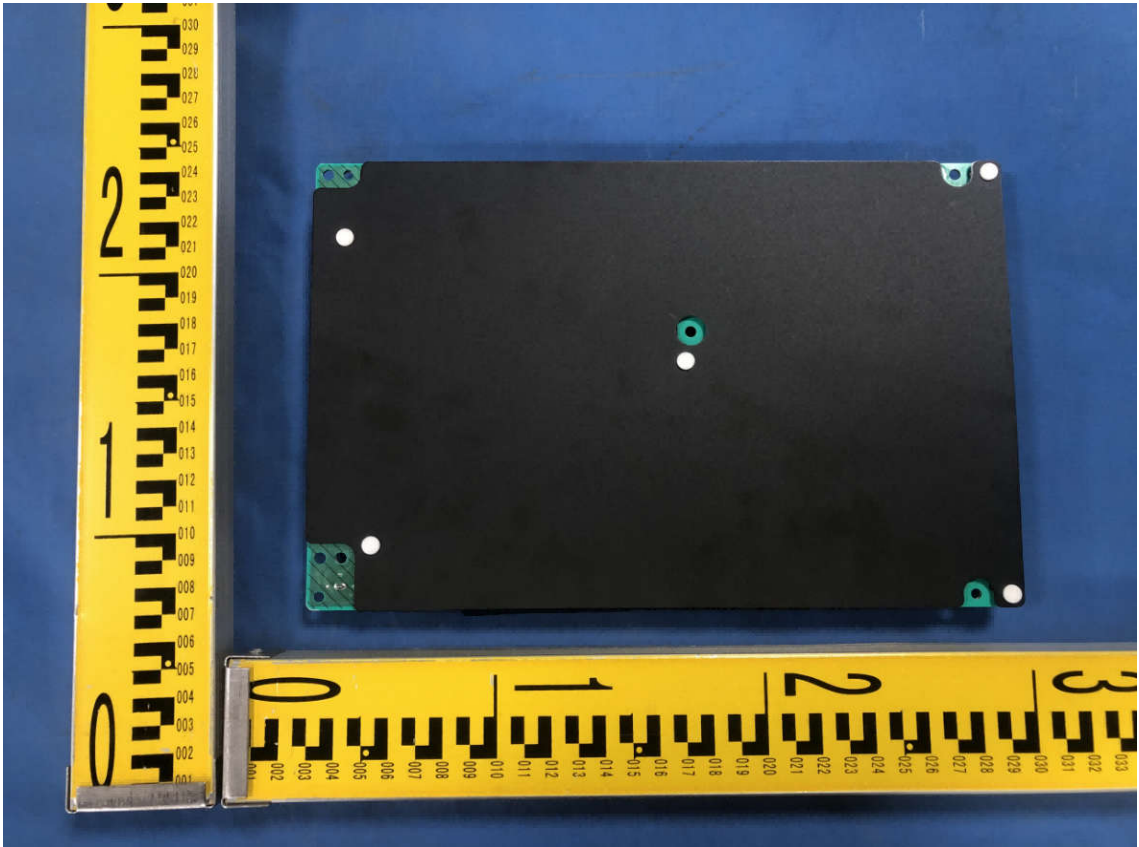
Power board PW.D232W2.751 Mylar sheet view
